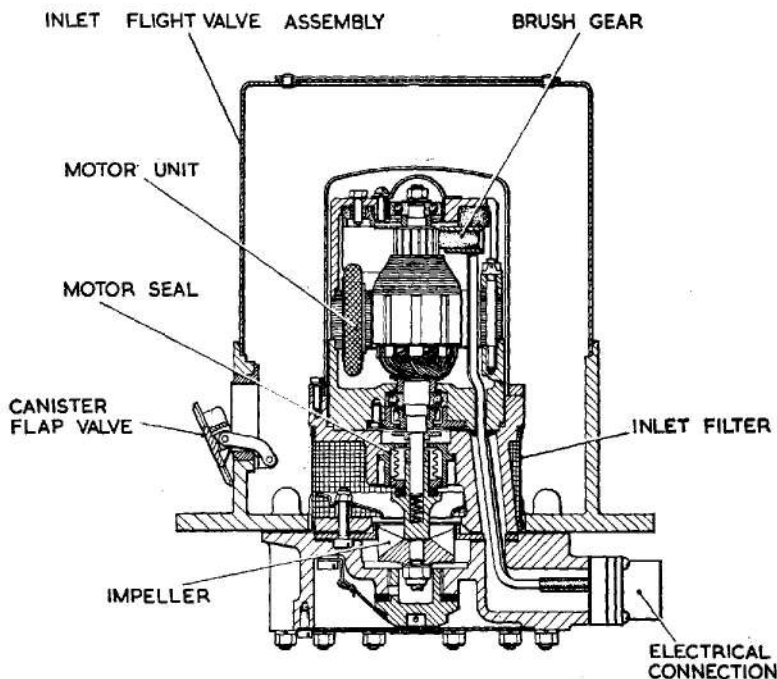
Sectional view of PDC20 Mk. 2 fuel pump and inverted flight valve
